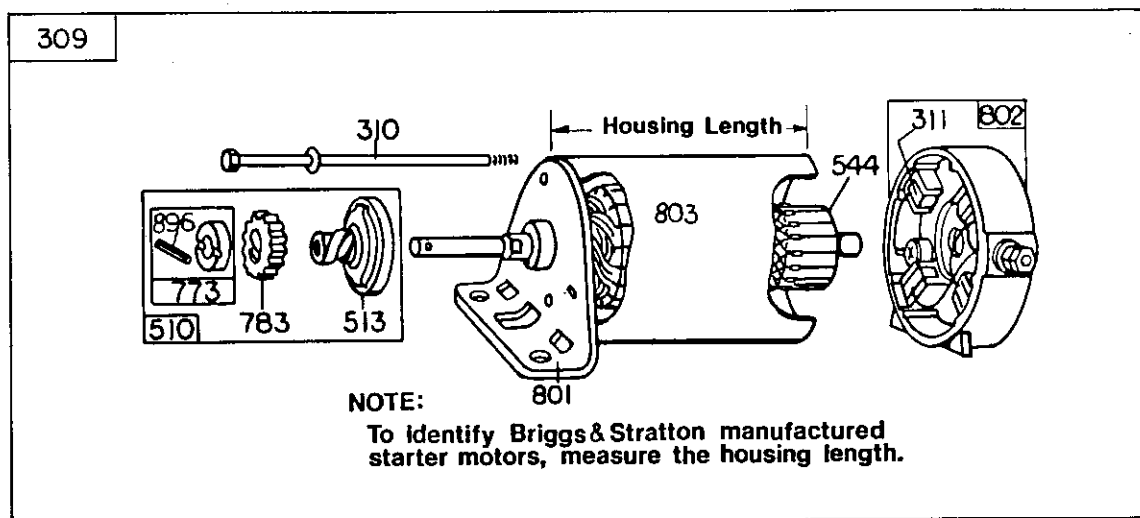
B. MODEL 1113 (BRIGG'S & STRATTON ENGINE ASSEMBLY 252707-0189-01)
